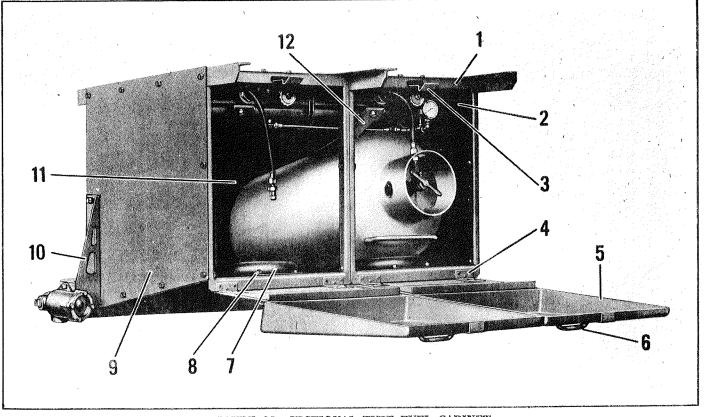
SECTIONAL TYPE FUEL CABINET
